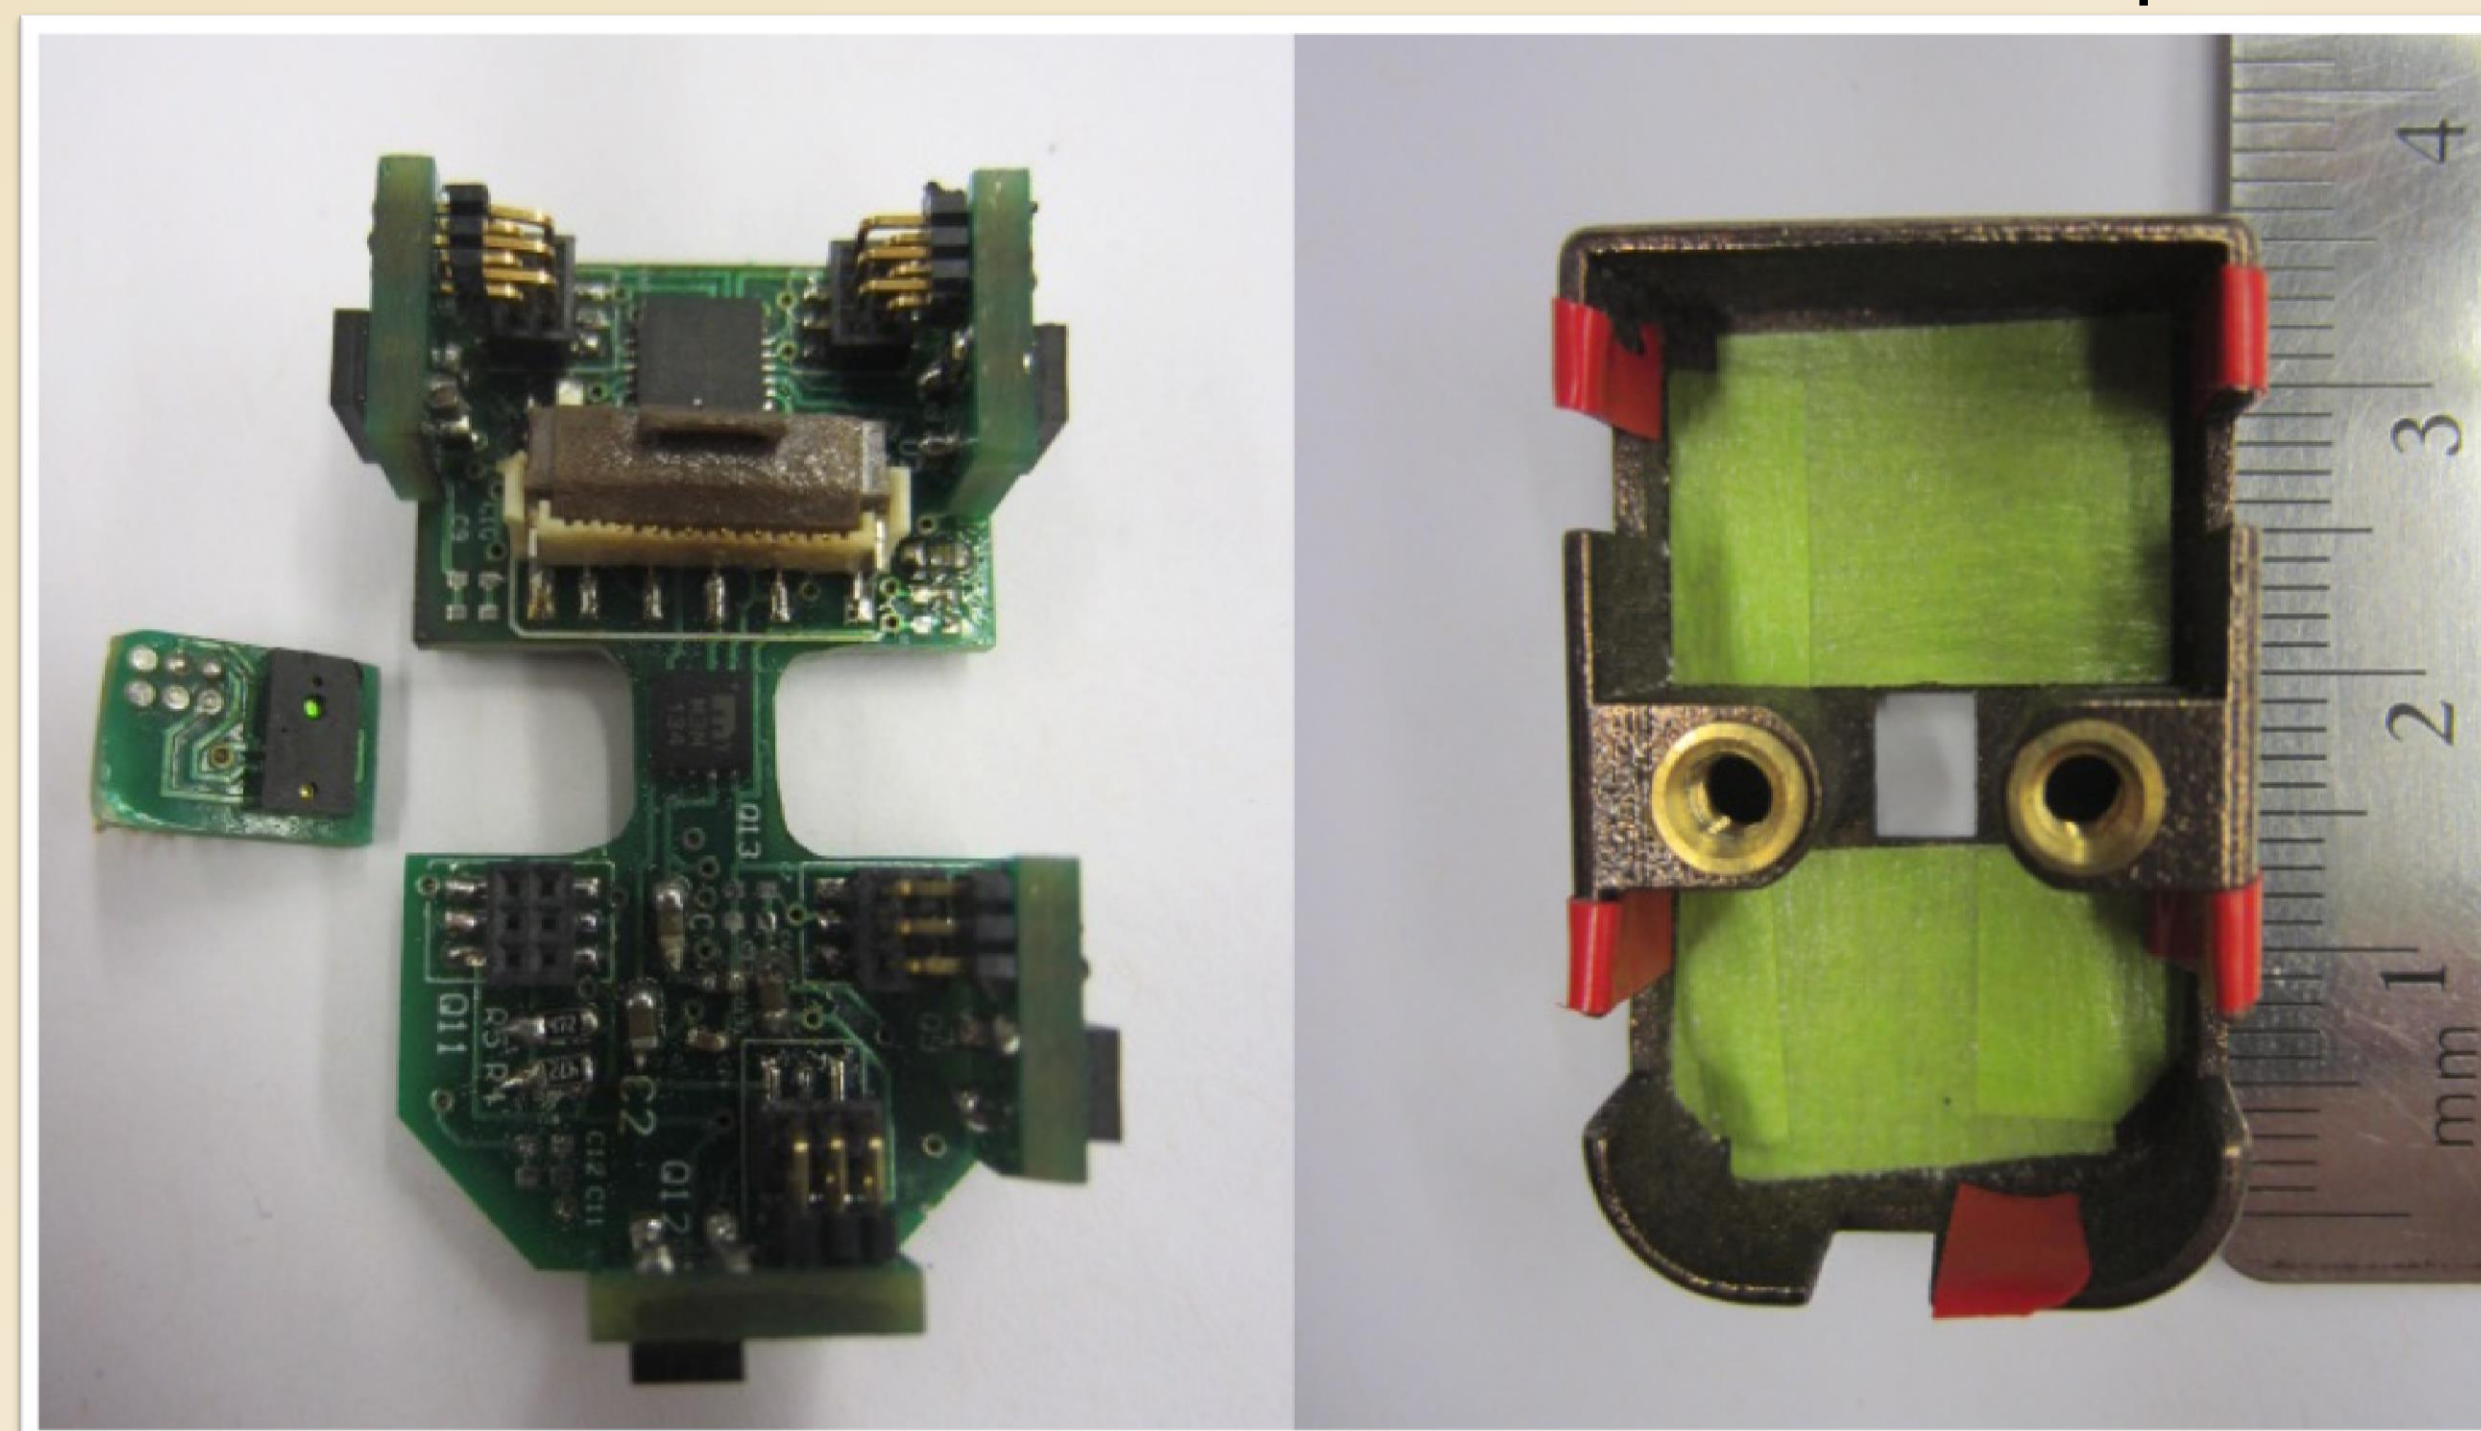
Left: The PCB that compose the sensor. Right: The 3D printed sensor casing. The hole in the middle of the case is for a sensing module soldered to the bottom of the main PCB.
